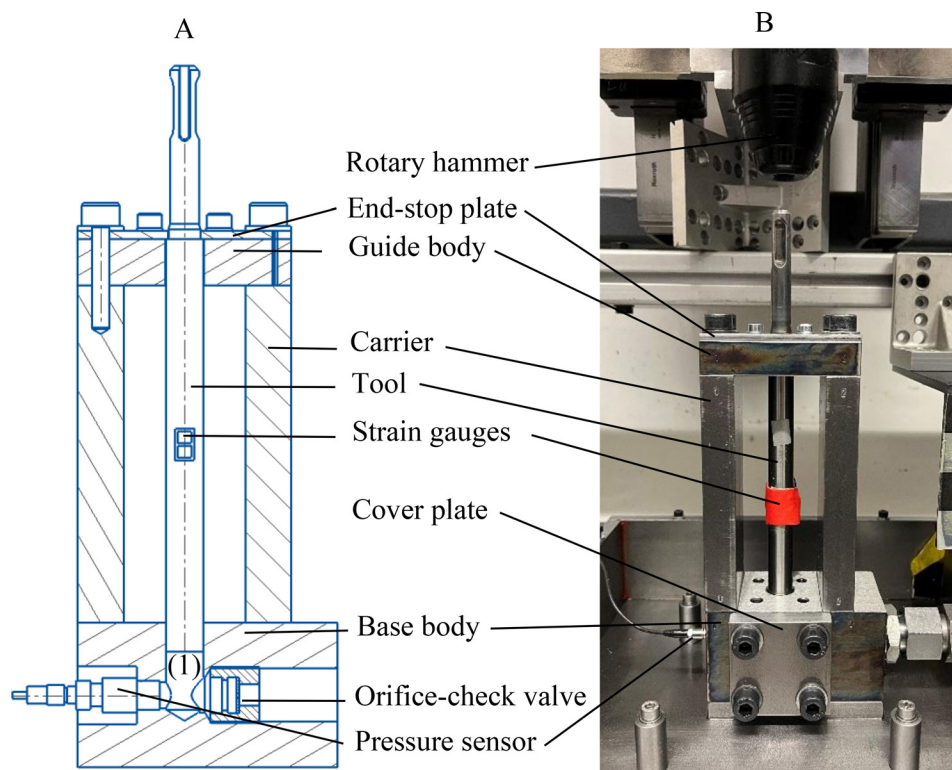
Hydraulic substitute base for rotary hammers: (A) sectional drawing, (B) photo.
